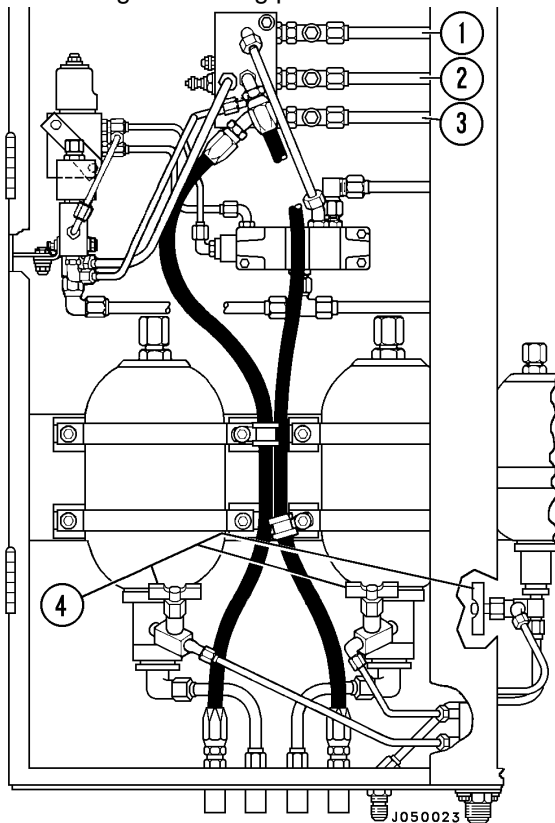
630E/685E BRAKE CONTROL CABINET
